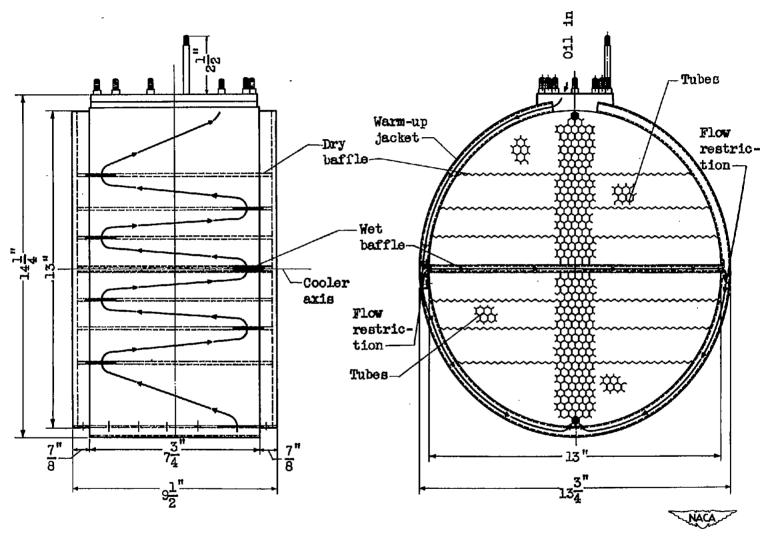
Schematic diagram of jacketed 13-inch oil cooler B.
